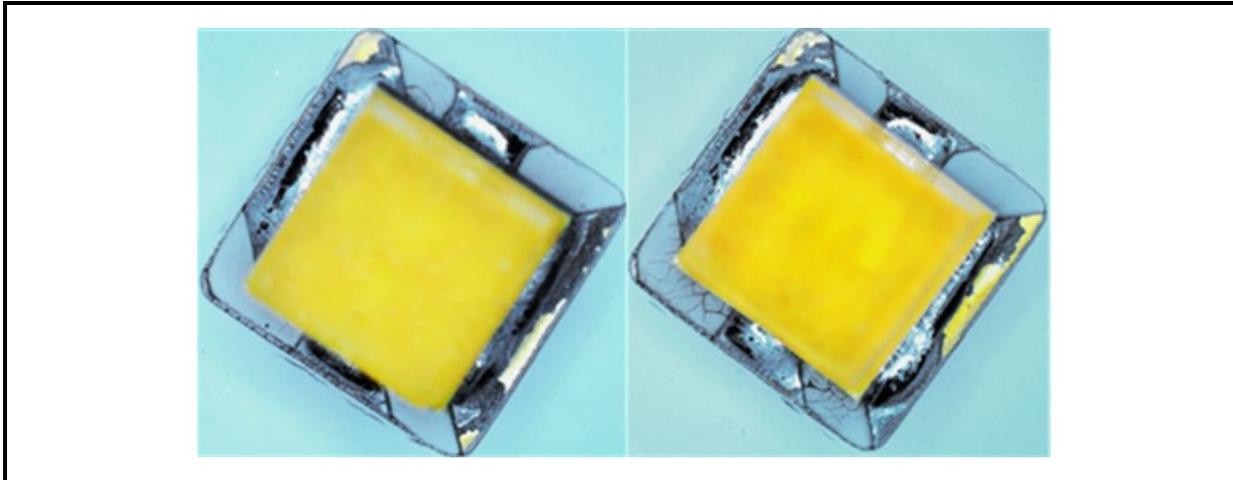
Two LEDs showing poor solder wetting on the gold pad.
